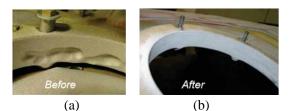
Corrosion of magnesium parts of a rotorcraft helicopter (a) and repaired by cold spray technology (b) [60]
